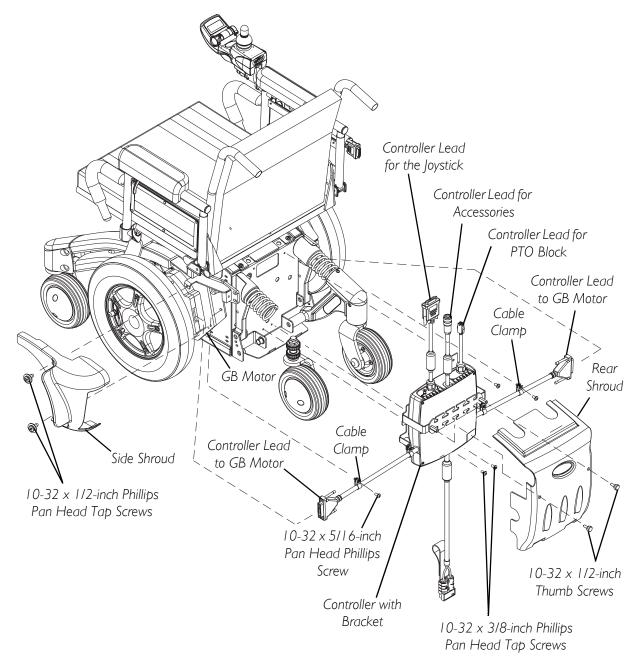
REMOVING/INSTALLING THE CONTROLLER WITH BRACKET
